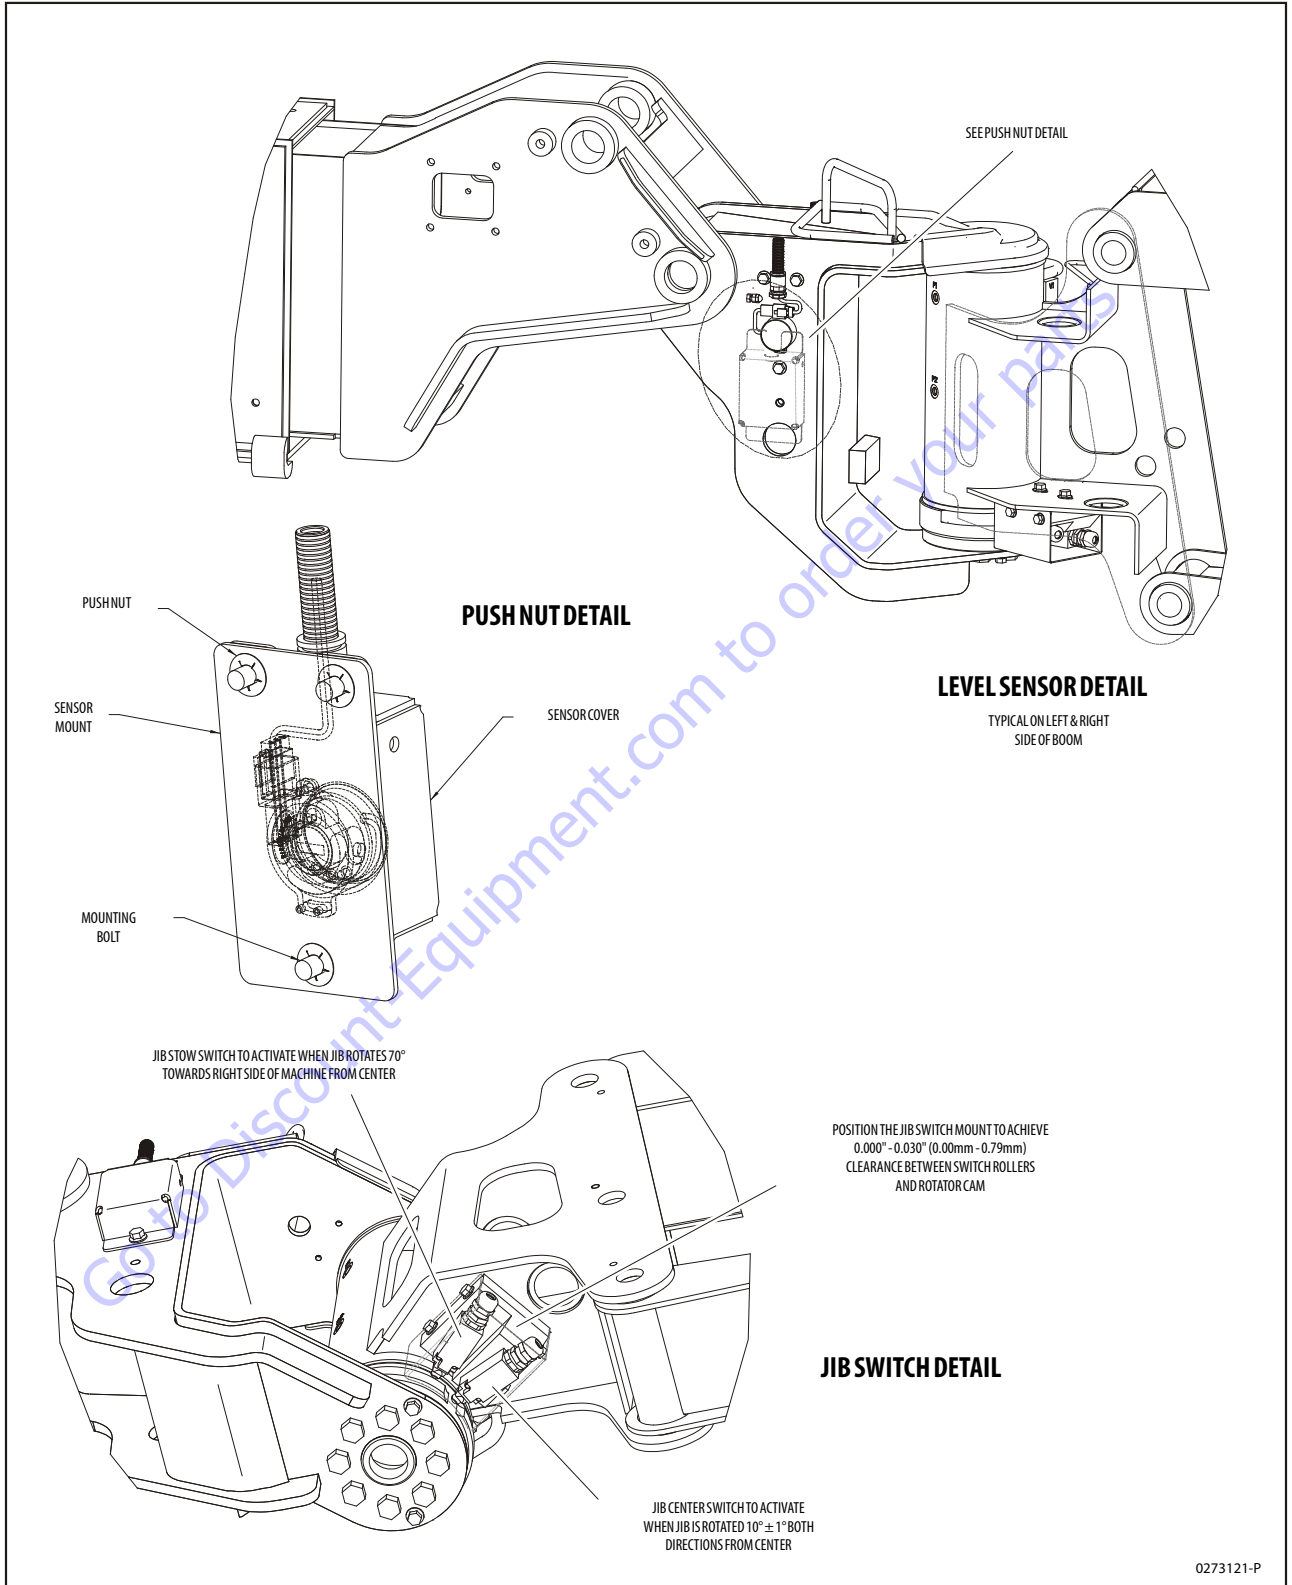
Boom Sensor Locations - Level & Jib Position Switches
